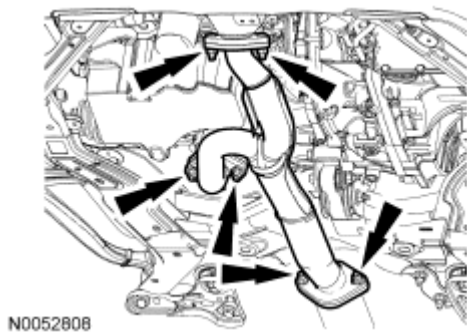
Locating Y-Pipe Nuts & Y-Pipe Assembly
